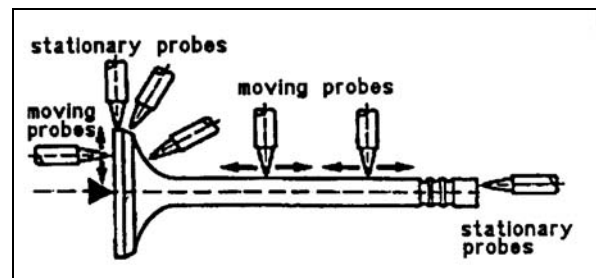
Valve testing with 7 probes simultaneously. Each probe scans one zone of the rotating valve.
